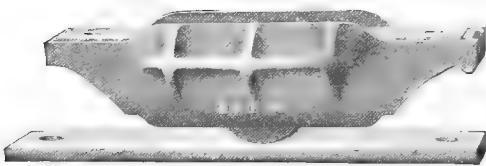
Passenger Train Car Side Bearing. Edwin S. Woods & Company.
